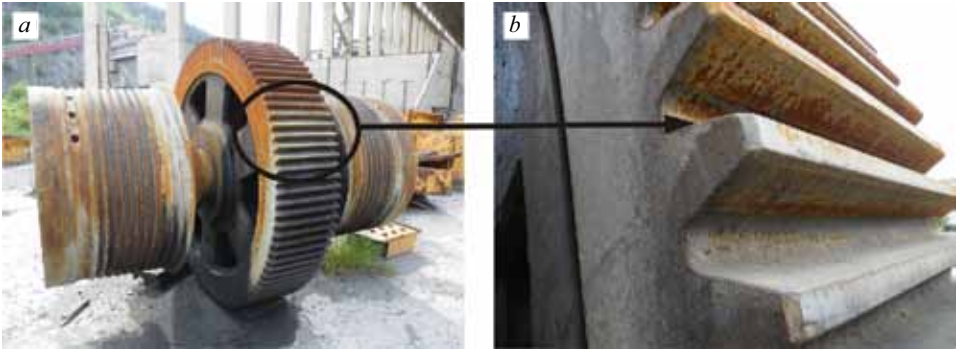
Photographs of the shaft S_3 an overall view (a) and a gear wheel detail shows that there are no visible destructions (b)
